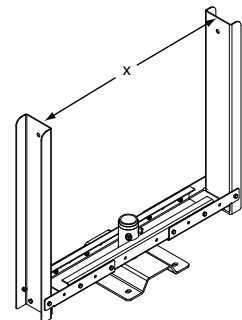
Fan Width Dimension For Ceiling-Mount Bracket
